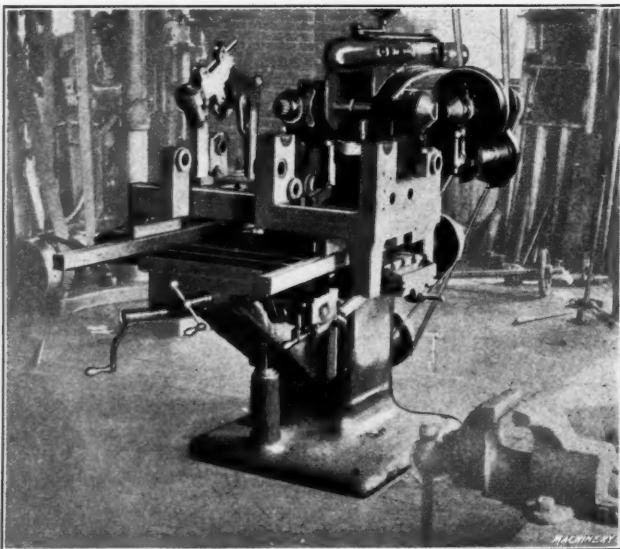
The Work Set up for Milling the Tops of the Bearing Posts
